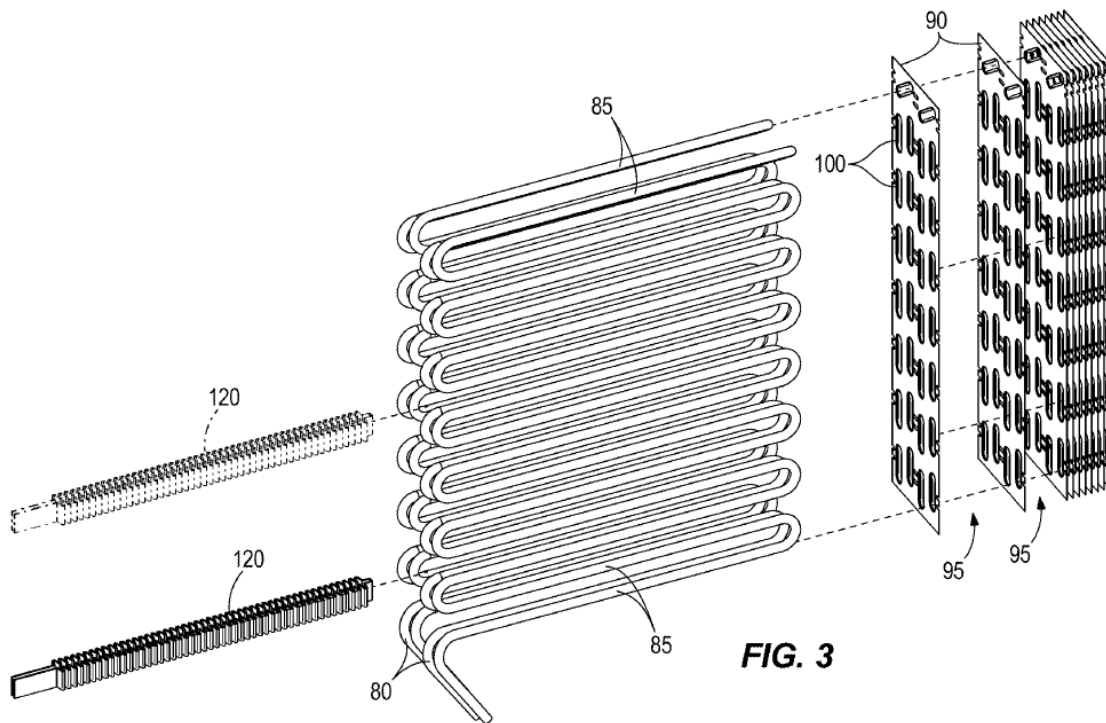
is an exploded perspective view of an evaporator illustrating the coils, the fins, and the heater insert. Spec. ¶ 12. Figure 3 shows two serpentine coils 80 that extend from the top of the figure to the bottom of the figure. As depicted in Figure 3, the coils are divided along their lengths into sections, or tube sections 85. We discern no disclosure of “tube section” that encompasses a cross-section of a coil or tube with interior walls of the coil as depicted by Usov. *See* Usov, 3:13–15 (“cross-section”). We understand the broadest reasonable interpretation of the phrase “tube section,” consistent with Appellant’s Specification to require that the tube section is a longitudinally extending portion of the fully enclosed coil tube. In view of this, as Appellant argues persuasively, Usov does not disclose a heater insert “adjacent an exterior of the tube section.” Given that the Examiner does not rely on Beasley for this feature, the Examiner has not established adequately that the combined teachings of Usov and Beasley suggest a heater insert extending through one or more of the axially aligned tube slots adjacent an exterior of the tube section, as required by claim 1.
